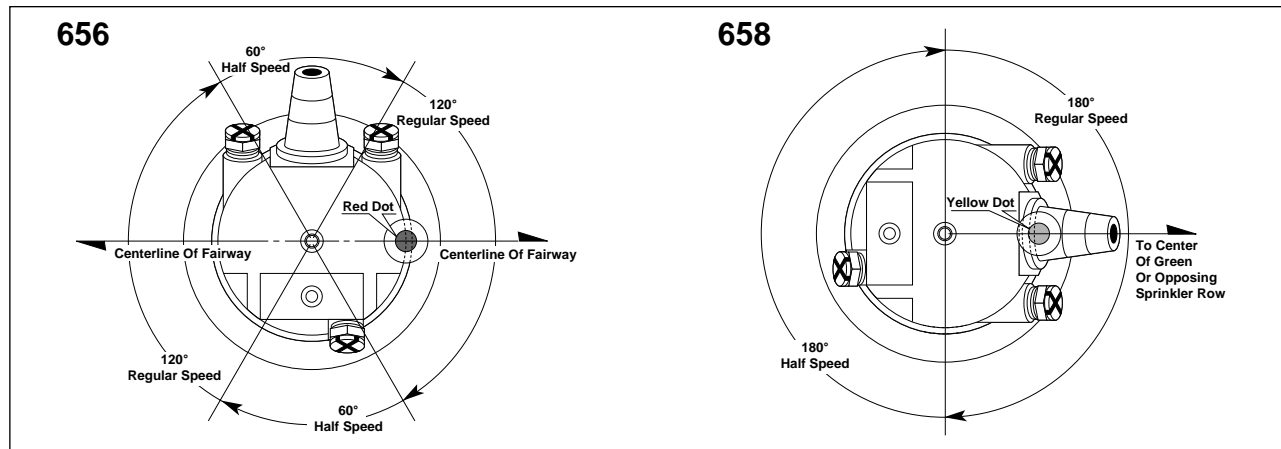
Alignment of Drive Assembly to Turf Coverage
